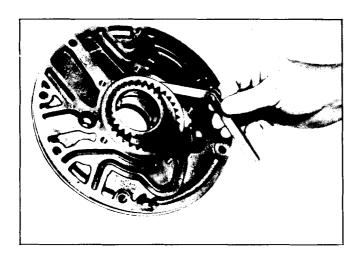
F-63 Checking Driven Gear-To-Pump Body Clearance
